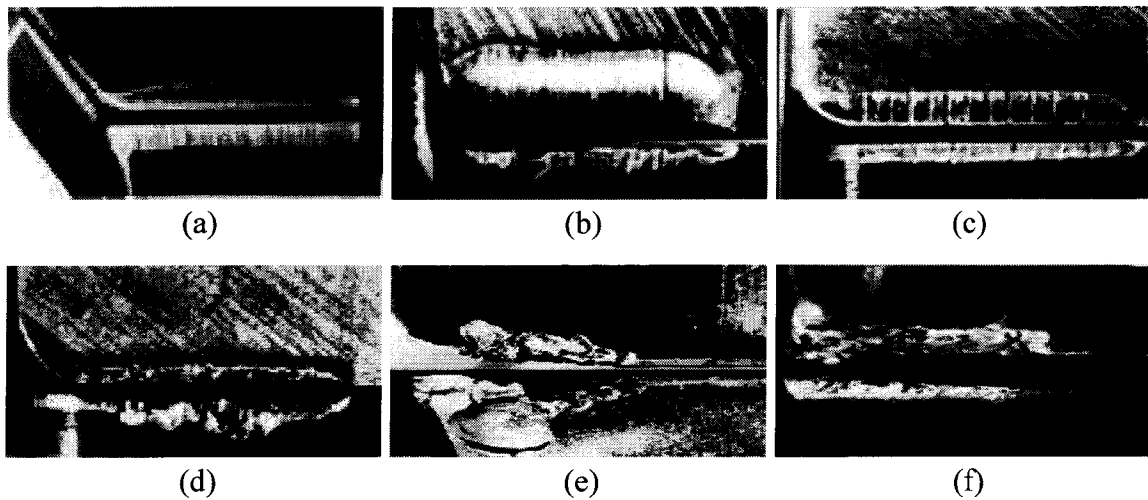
Type of wear: (a) flank wear; (b) crater wear; (c) thermal cracking; (d) chipping; (e) fracturing; (f) welding (Mitsubishi Materials Co., n.d.)
